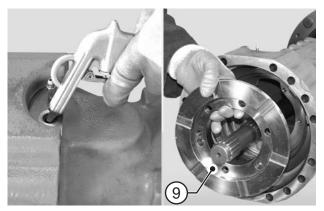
Slowly introduce low-pressure compressed air through the connection member for the service brake (P1), in order to extract the piston (9).
